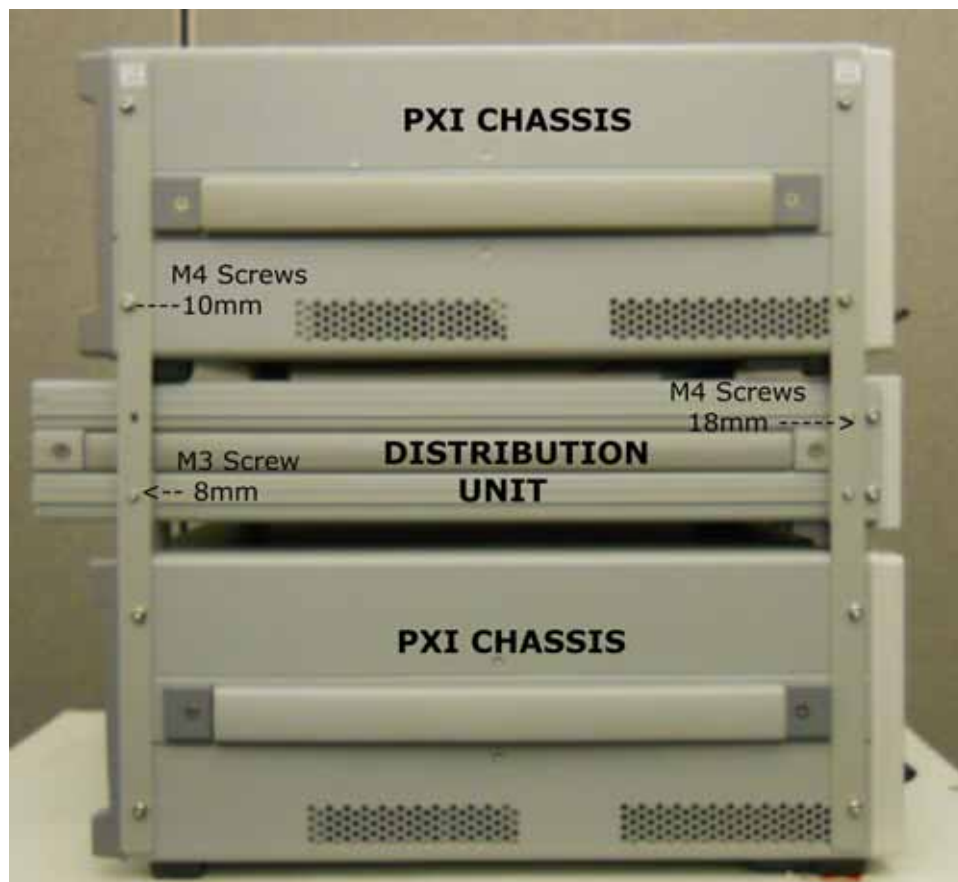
Attaching the Distribution Unit to the Lower PXI Chassis
